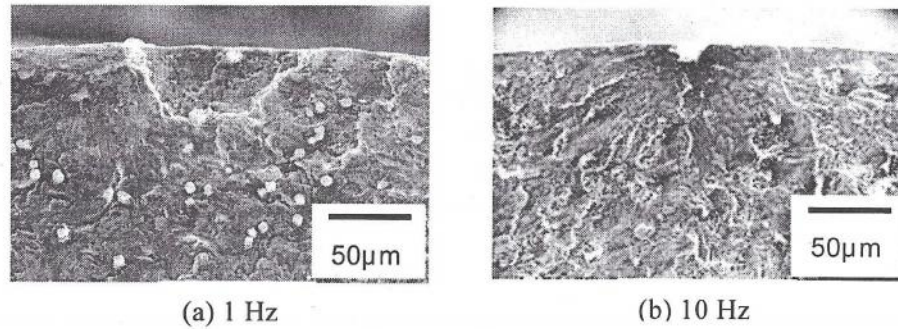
SEM fractographs showing a corrosion pit in specimen tested at 130 MPa under 1 and 10 Hz at 50°C-80 %RH
